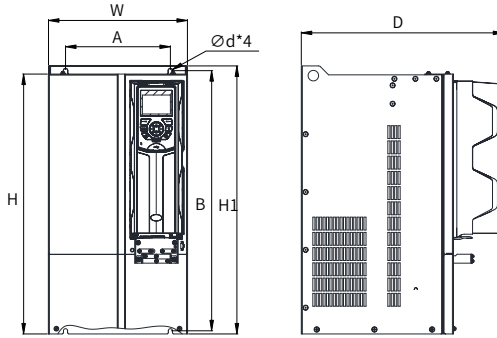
Overall and mounting dimensions of structures T2 to T9
